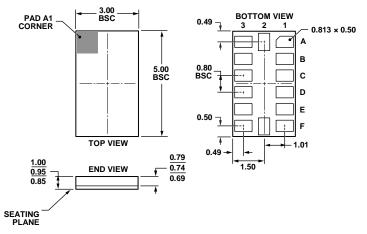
14-Terminal Land Grid Array [LGA] (CC-14-1) Solder Terminations Finish Is Au over Ni (Dimensions shown in millimeters)
